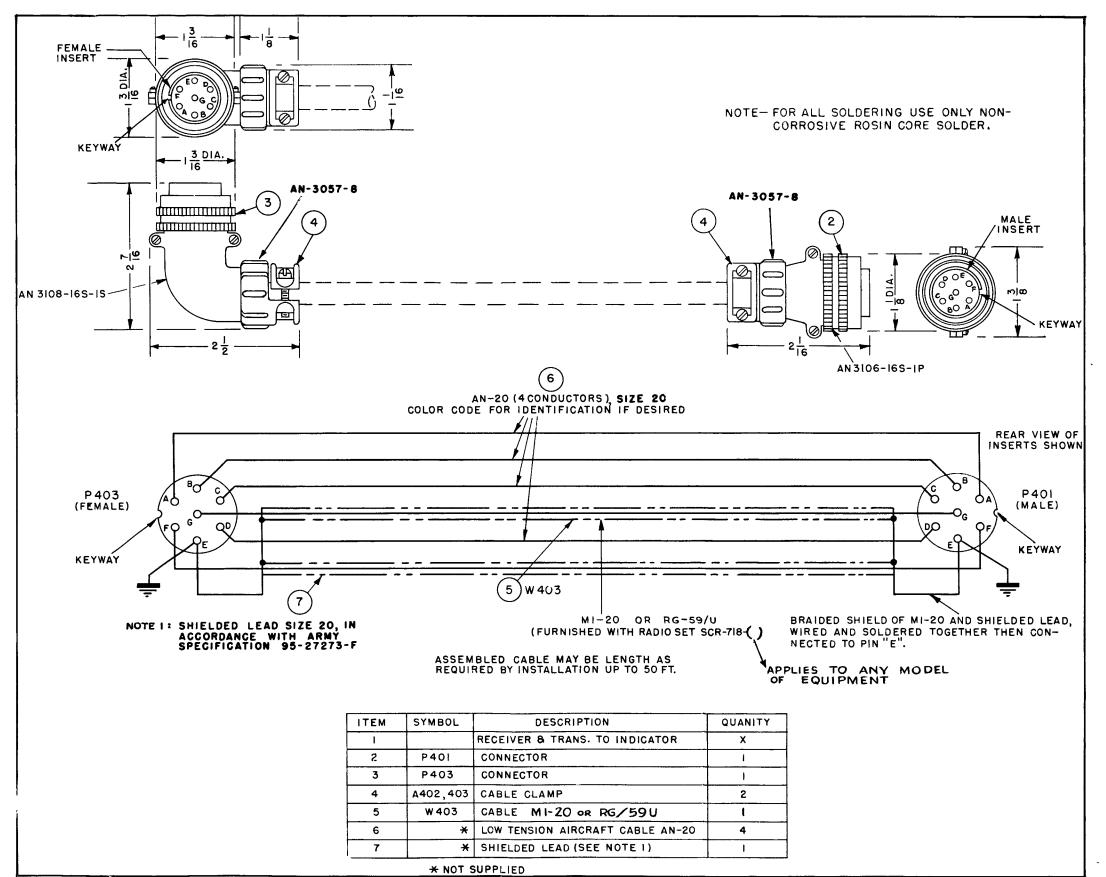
Radio Receiver and Transmitter BC-788-(*) — Cable Assembly Diagram
